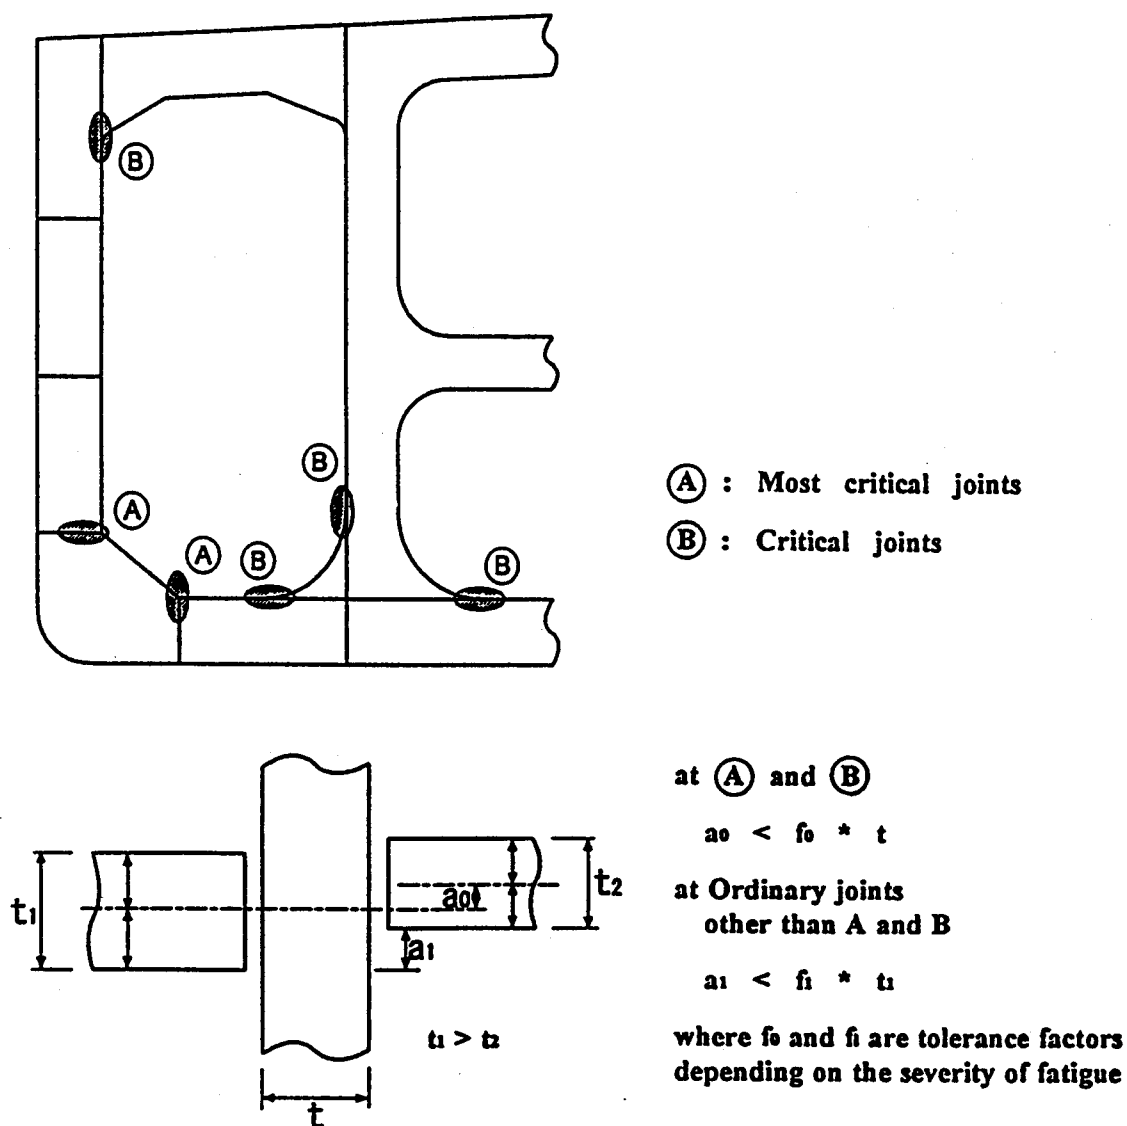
Critical cruciform joints and tolerances in alignment.
